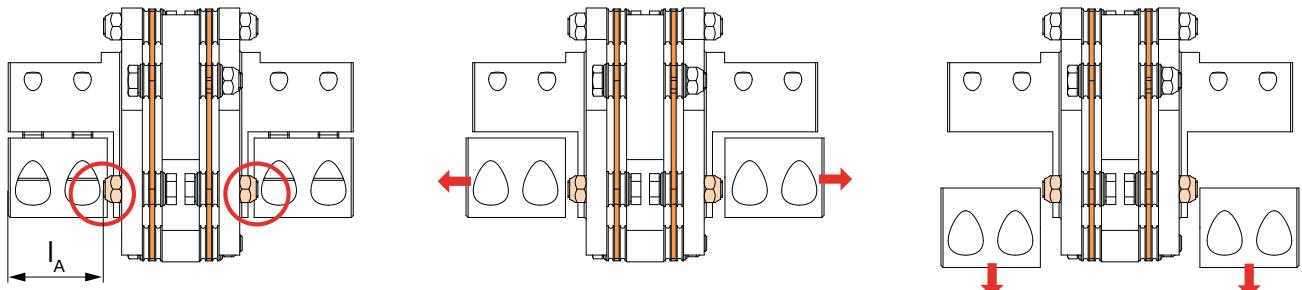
Axial displacement of the half-shells during radial assembly/disassembly (only necessary on Type 951.881).
